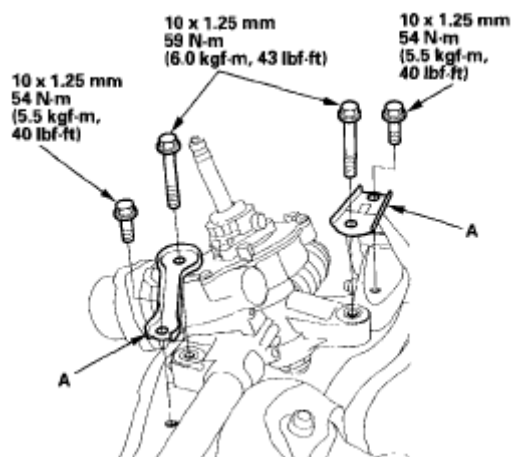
Identifying Stiffener Plates (A) And Gearbox Mounting Bolts (With Torque Specifications)
